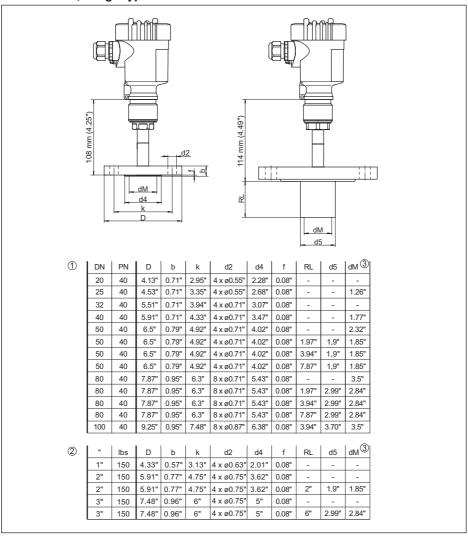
VEGABAR 51, flange version, dimensions in inch
